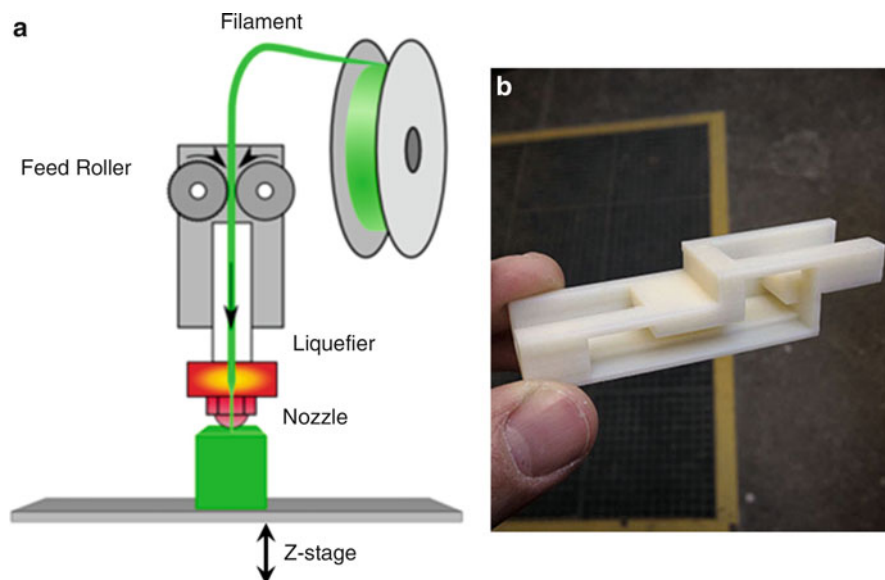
(a) Schematic of FDM. (b) An example printed using FDM
